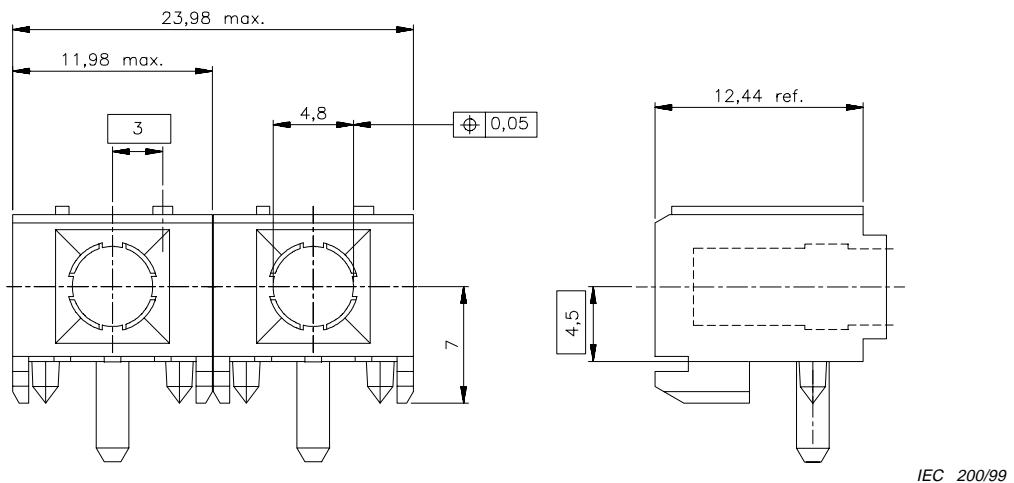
Mounting for free board connector module, signal and power contacts, solder termination
